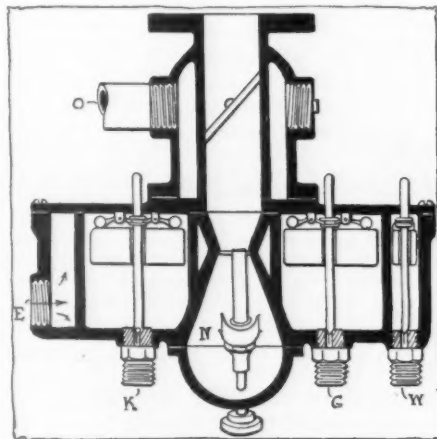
CROSS SECTIONAL DIAGRAM OF HAMPTON CARBURETER
